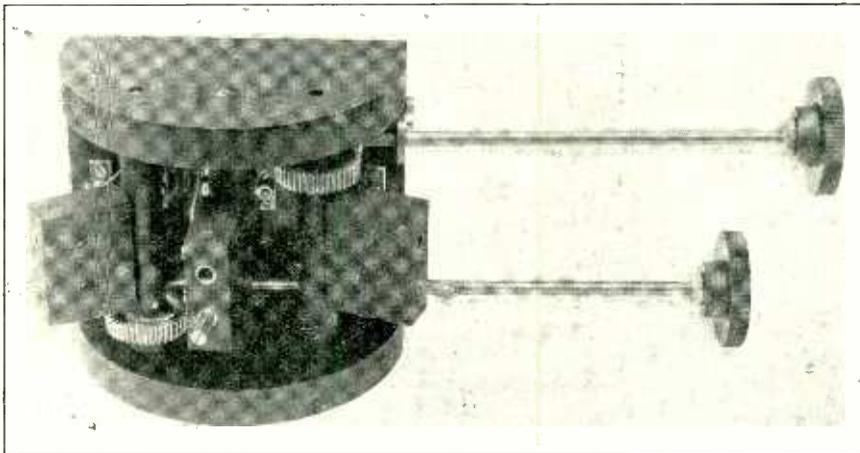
Coil holder arranged with gearing to provide critical adjustment. The two wheels seen in the photograph are secured to the coil holder spindles by means of spring washers so that while sufficient grip is obtained for the wheels to turn the coils, the coils may be moved to any position without propelling by the pinions.
